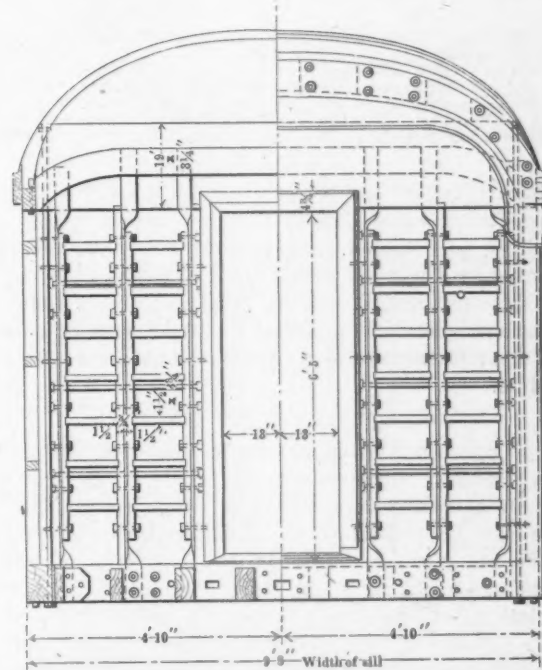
DETAILS OF LARGE END DOOR OF CAR FOR AUTOMOBILES.
